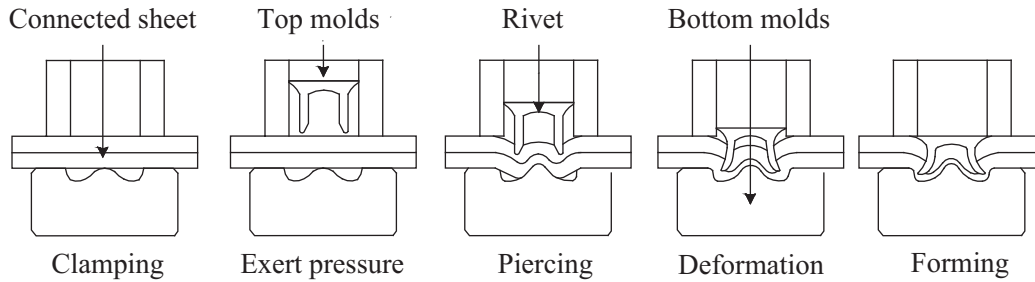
Prototyping mechanism of self-piercing riveted joint [6].
